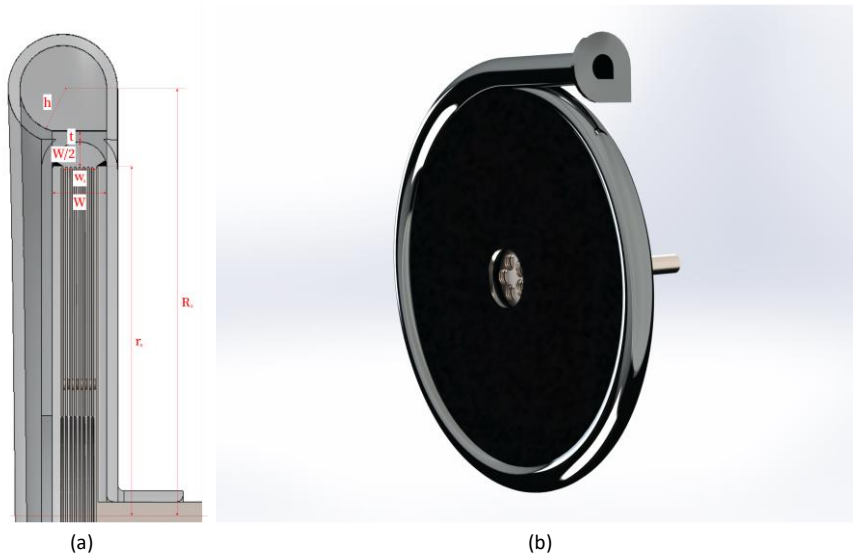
Cross sectional view and (b) Rendered Isometric view of the volute casing tesla turbine design.
